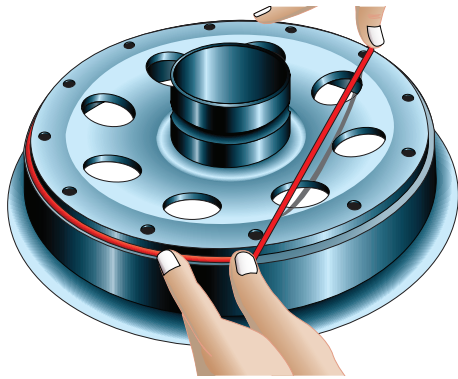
The wheel half O-ring for a tubeless tire wheel assembly must be in good condition and lubricated to seal for the entire life of the tire. The mating surfaces of the wheel halves must also be in good condition.
